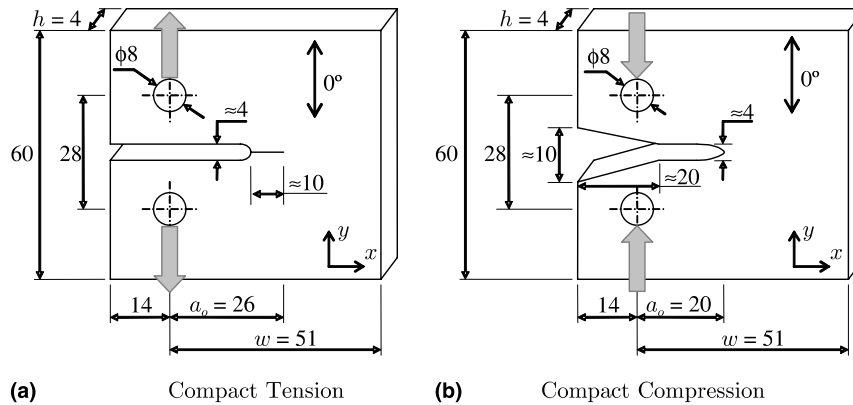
Test specimen nominal dimensions (in mm) for: (a) tensile and (b) compression fibre-breaking fracture toughness tests.
